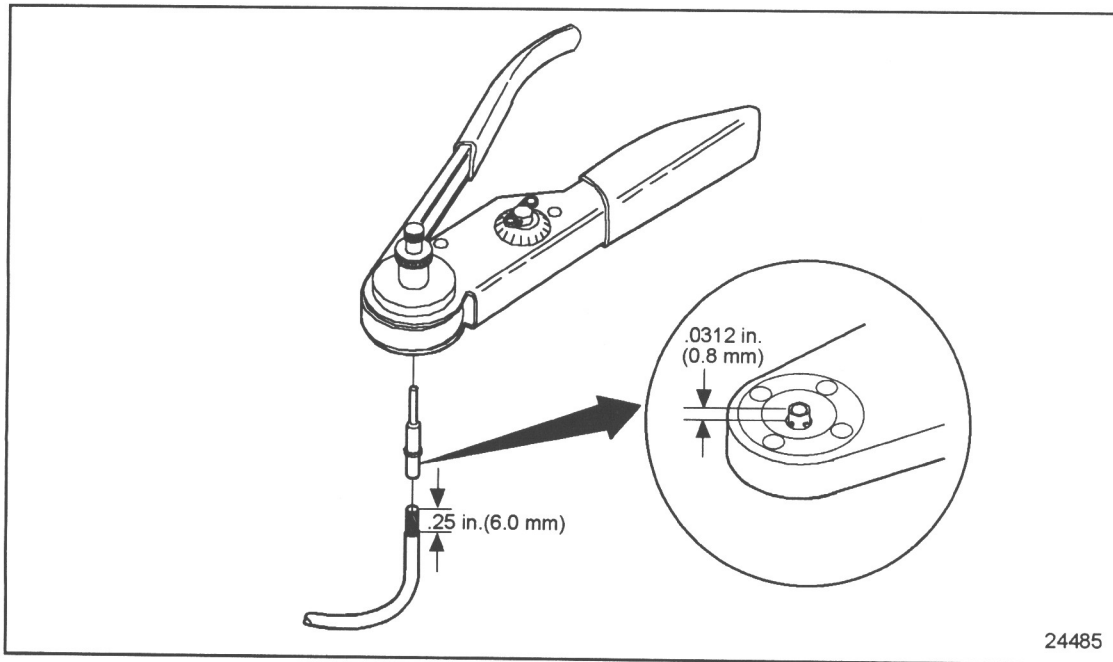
Setting Wire Gauge Selector and Positioning the Contact
